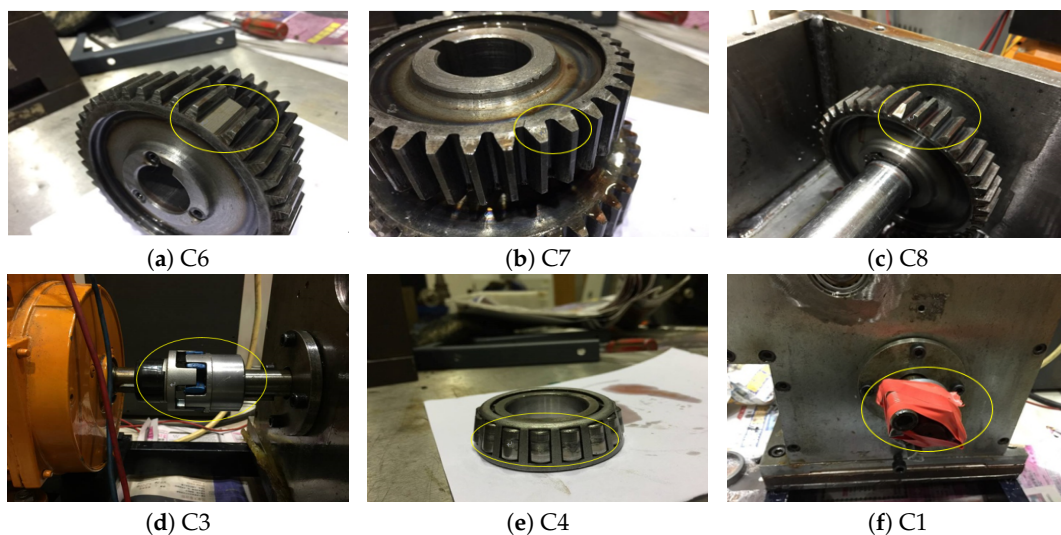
Singular Component Failure in WTGS. (a) Gear tooth broken fault; (b) gear crack fault; (c) chipped tooth fault; (d) mechanical misalignment fault; (e) wear of cage and rolling elements of bearing; (f) Unbalance.
